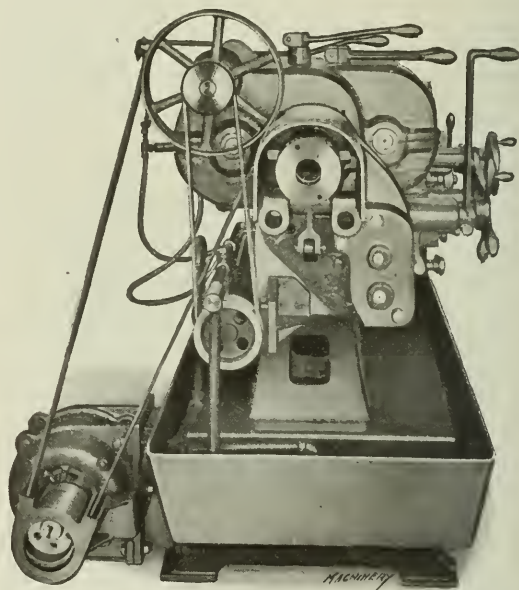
End View of Foster Universal Turret Lathe, showing Motor Drive
